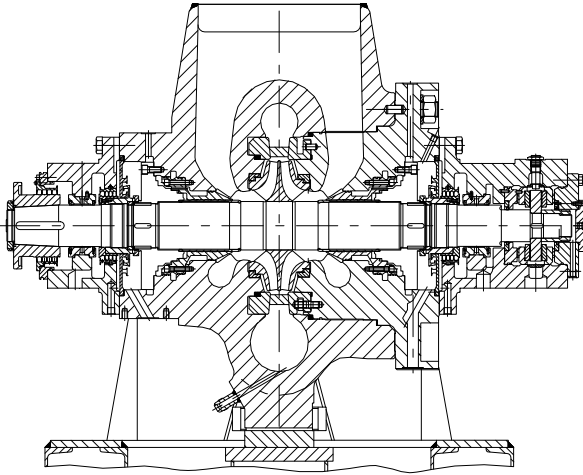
Boiler feed pump with double-entry impeller, volute and diffuser, Sulzer Pumps
